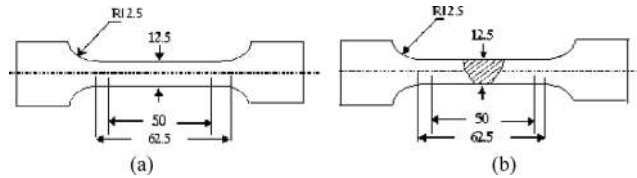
Schematic diagram of tensile specimen used for testing of (a) base metal and (b) weld joints.
